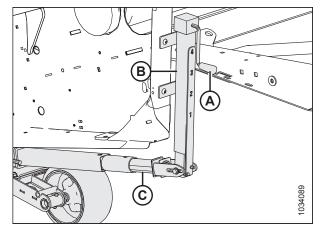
Jack and Outboard Wheel Assembly – View from Rear, Left Shown, Right Opposite
